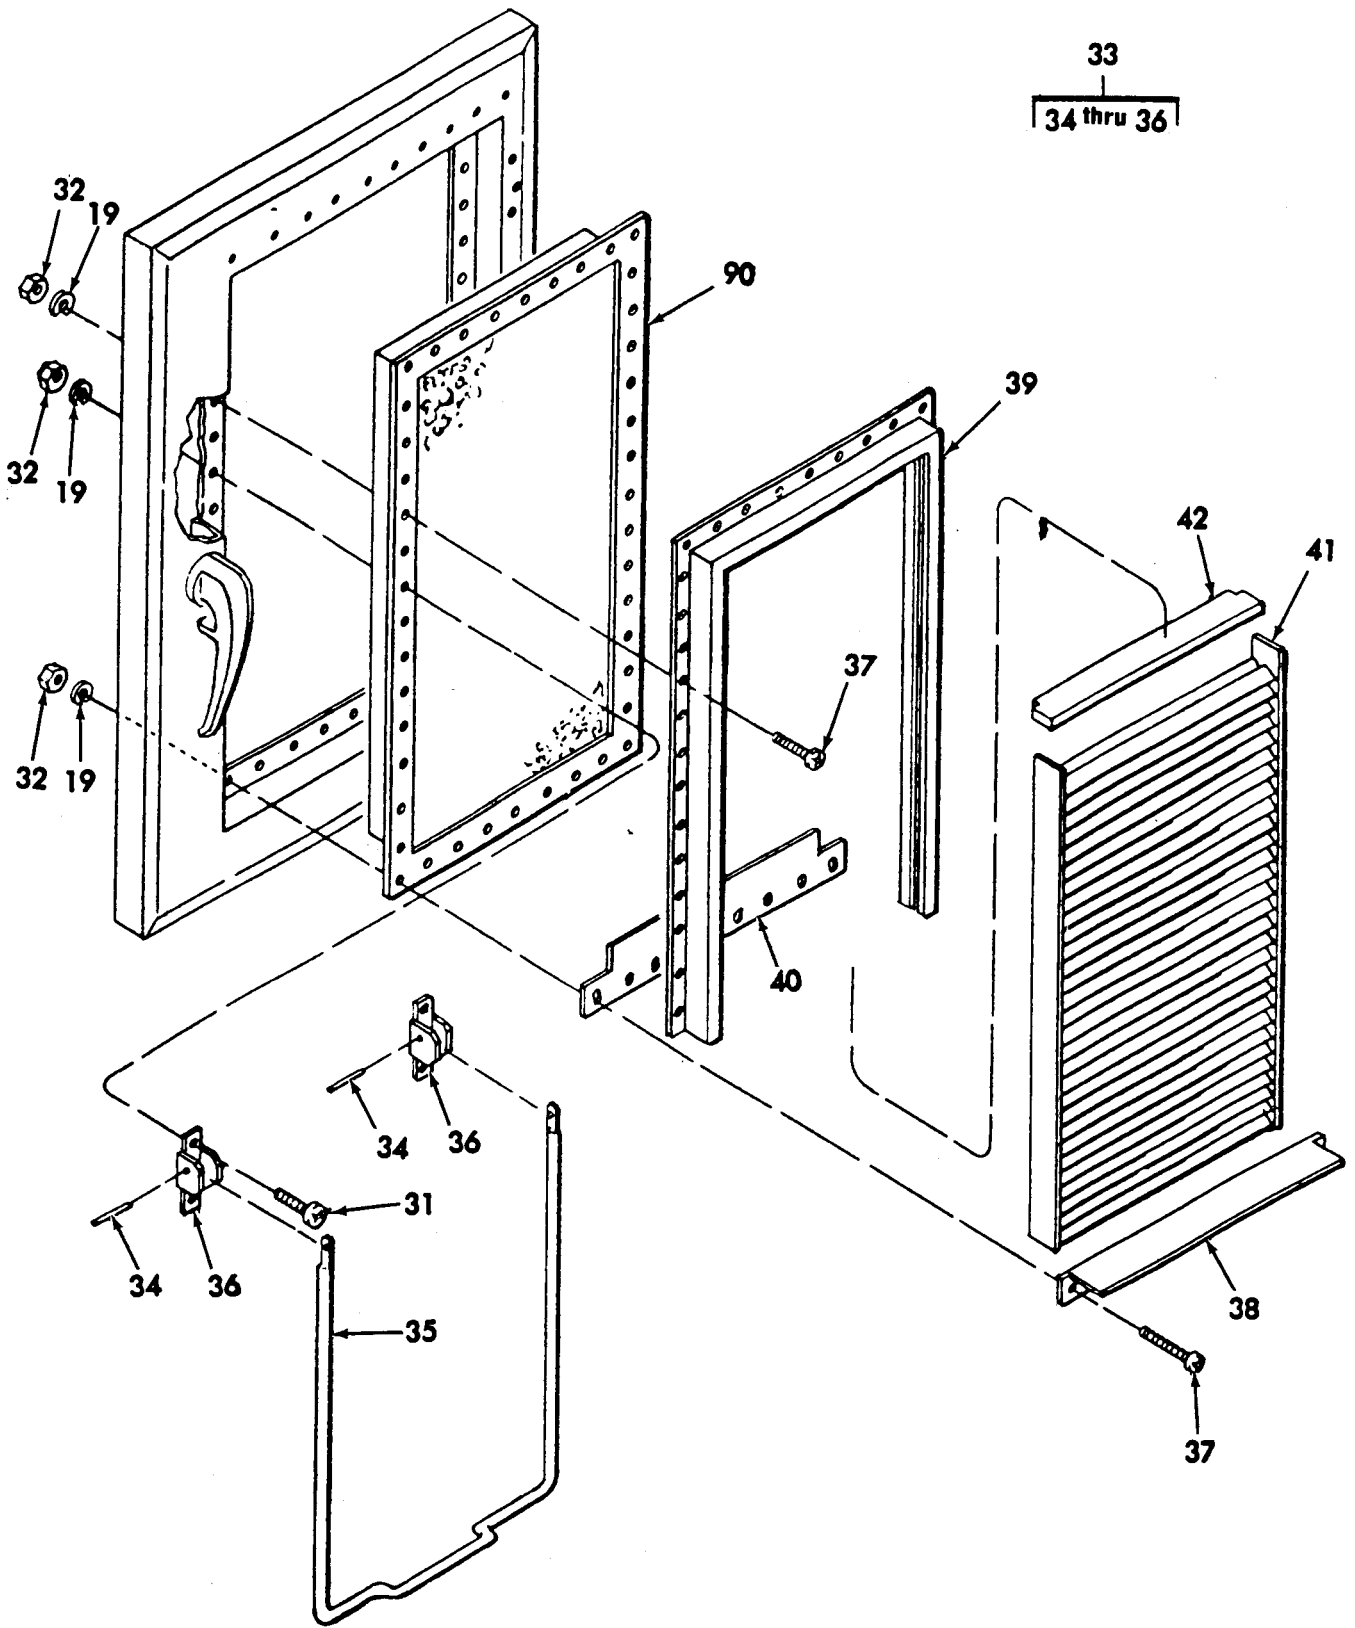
Inner Door Assembly (Sheet 2 of 4)
